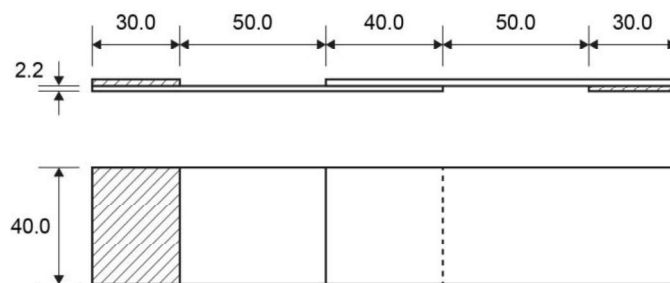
Dimensions in [mm] of the single lap shear specimens.
